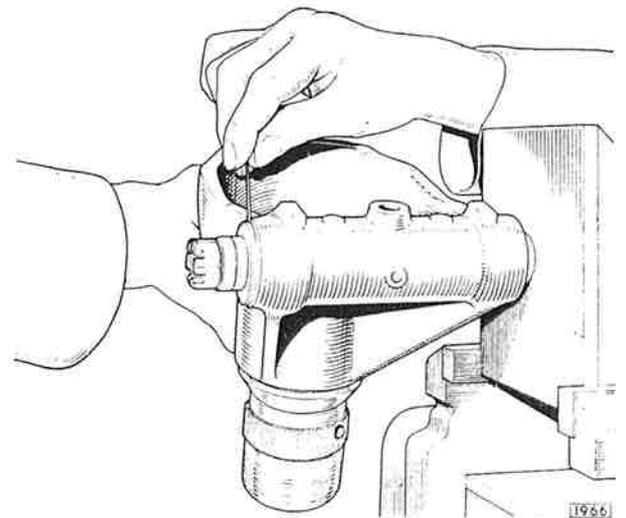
Measuring the amount of clearance between the hub carrier and large washer to determine the end float in the bearings
